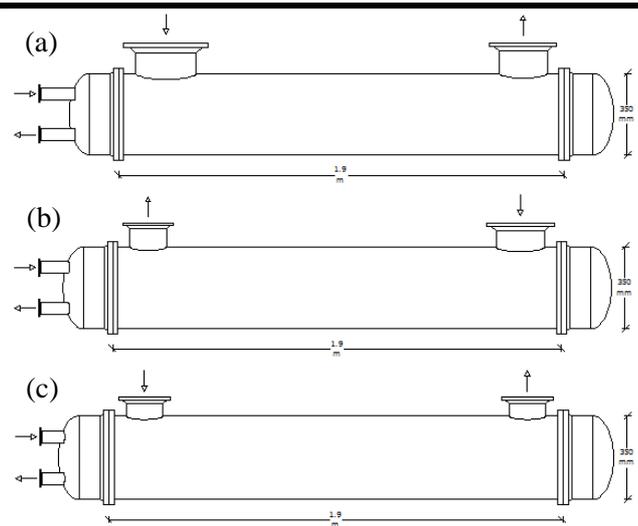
Sketch layout of 1st intercooler (a), 2nd intercooler (b), and aftercooler (c)
